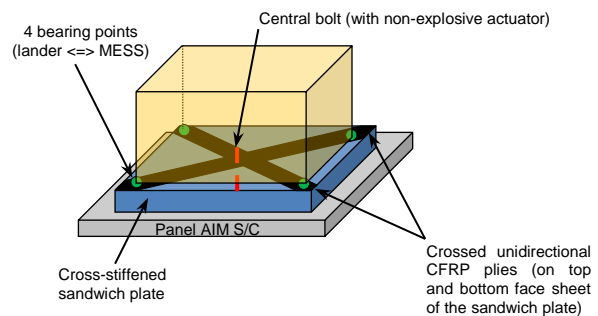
Variant M-2, cross-stiffened sandwich plate.
